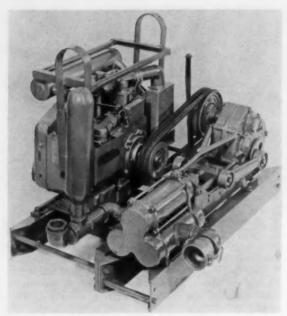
Original design of pump and drill unit (Fig. 6) made as a fabricated weldment (pump section only).
